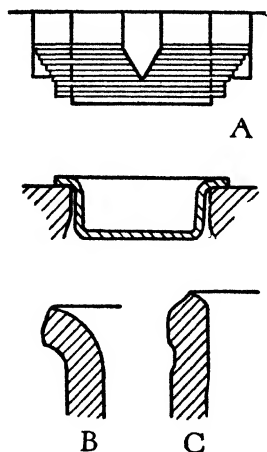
A trimming die with scrap cutters (A), the edge as trimmed (B), and as ironed after trimming (C).
